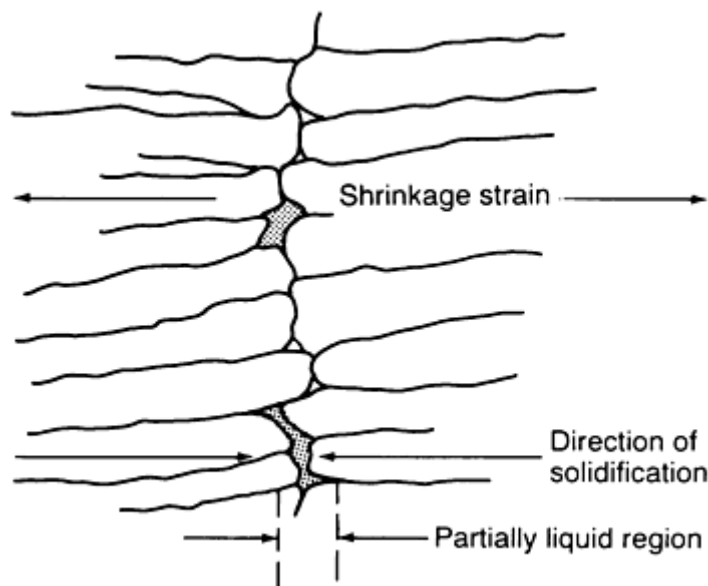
SCHEMATIC INDICATING PROJECTED MECHANISM OF SOLIDIFICATION CRACKING IN AN ELECTROSLAG WELDMENT. SOURCE: REF 54, 55
